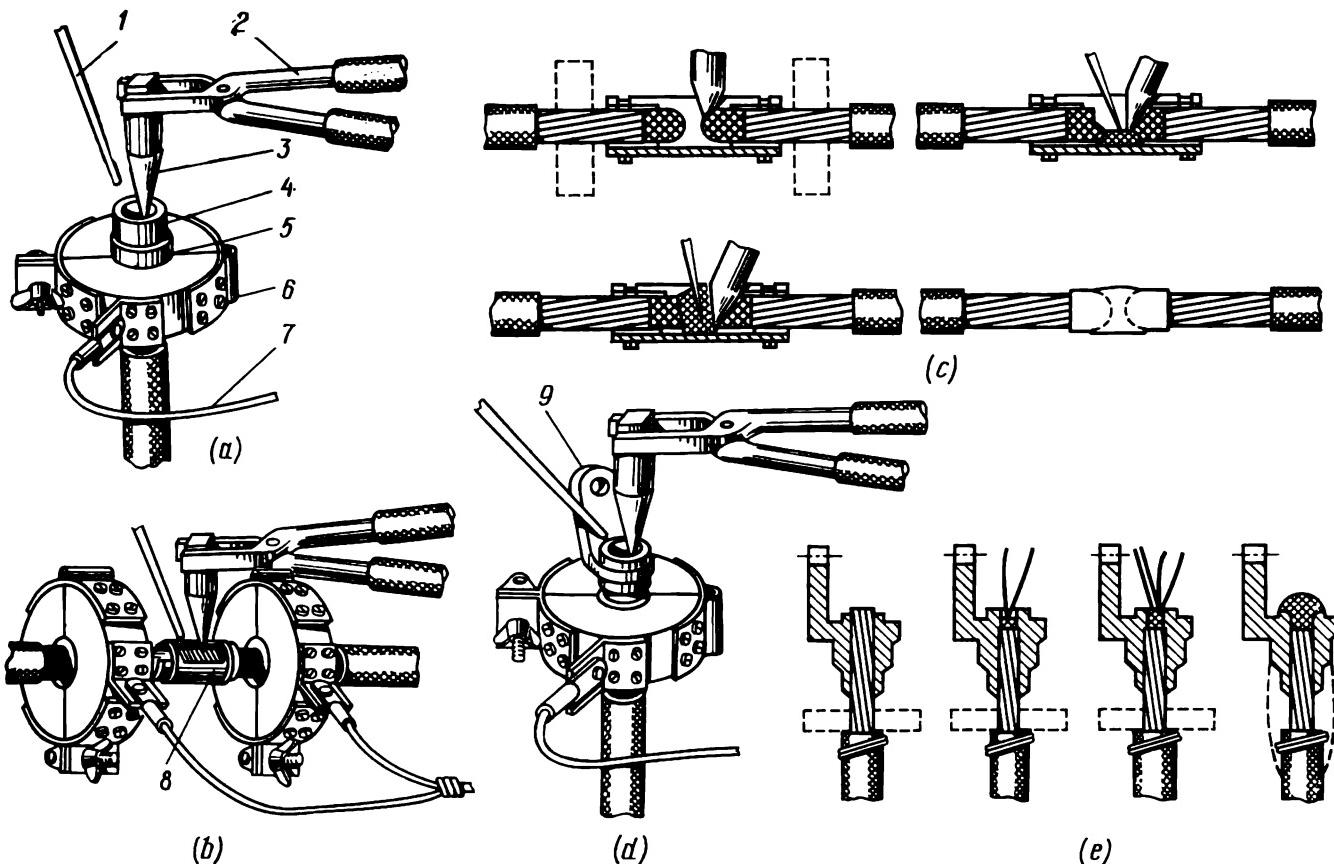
Resistance butt welding and termination of stranded aluminium conductors for conductor sectional areas of 16 to 240 mm²
